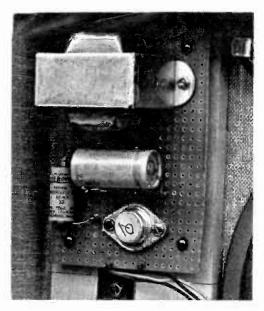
To avoid putting mounting screws through front of case, glue strips or blocks of wood to inside of case. Then mount AC supply on them.
